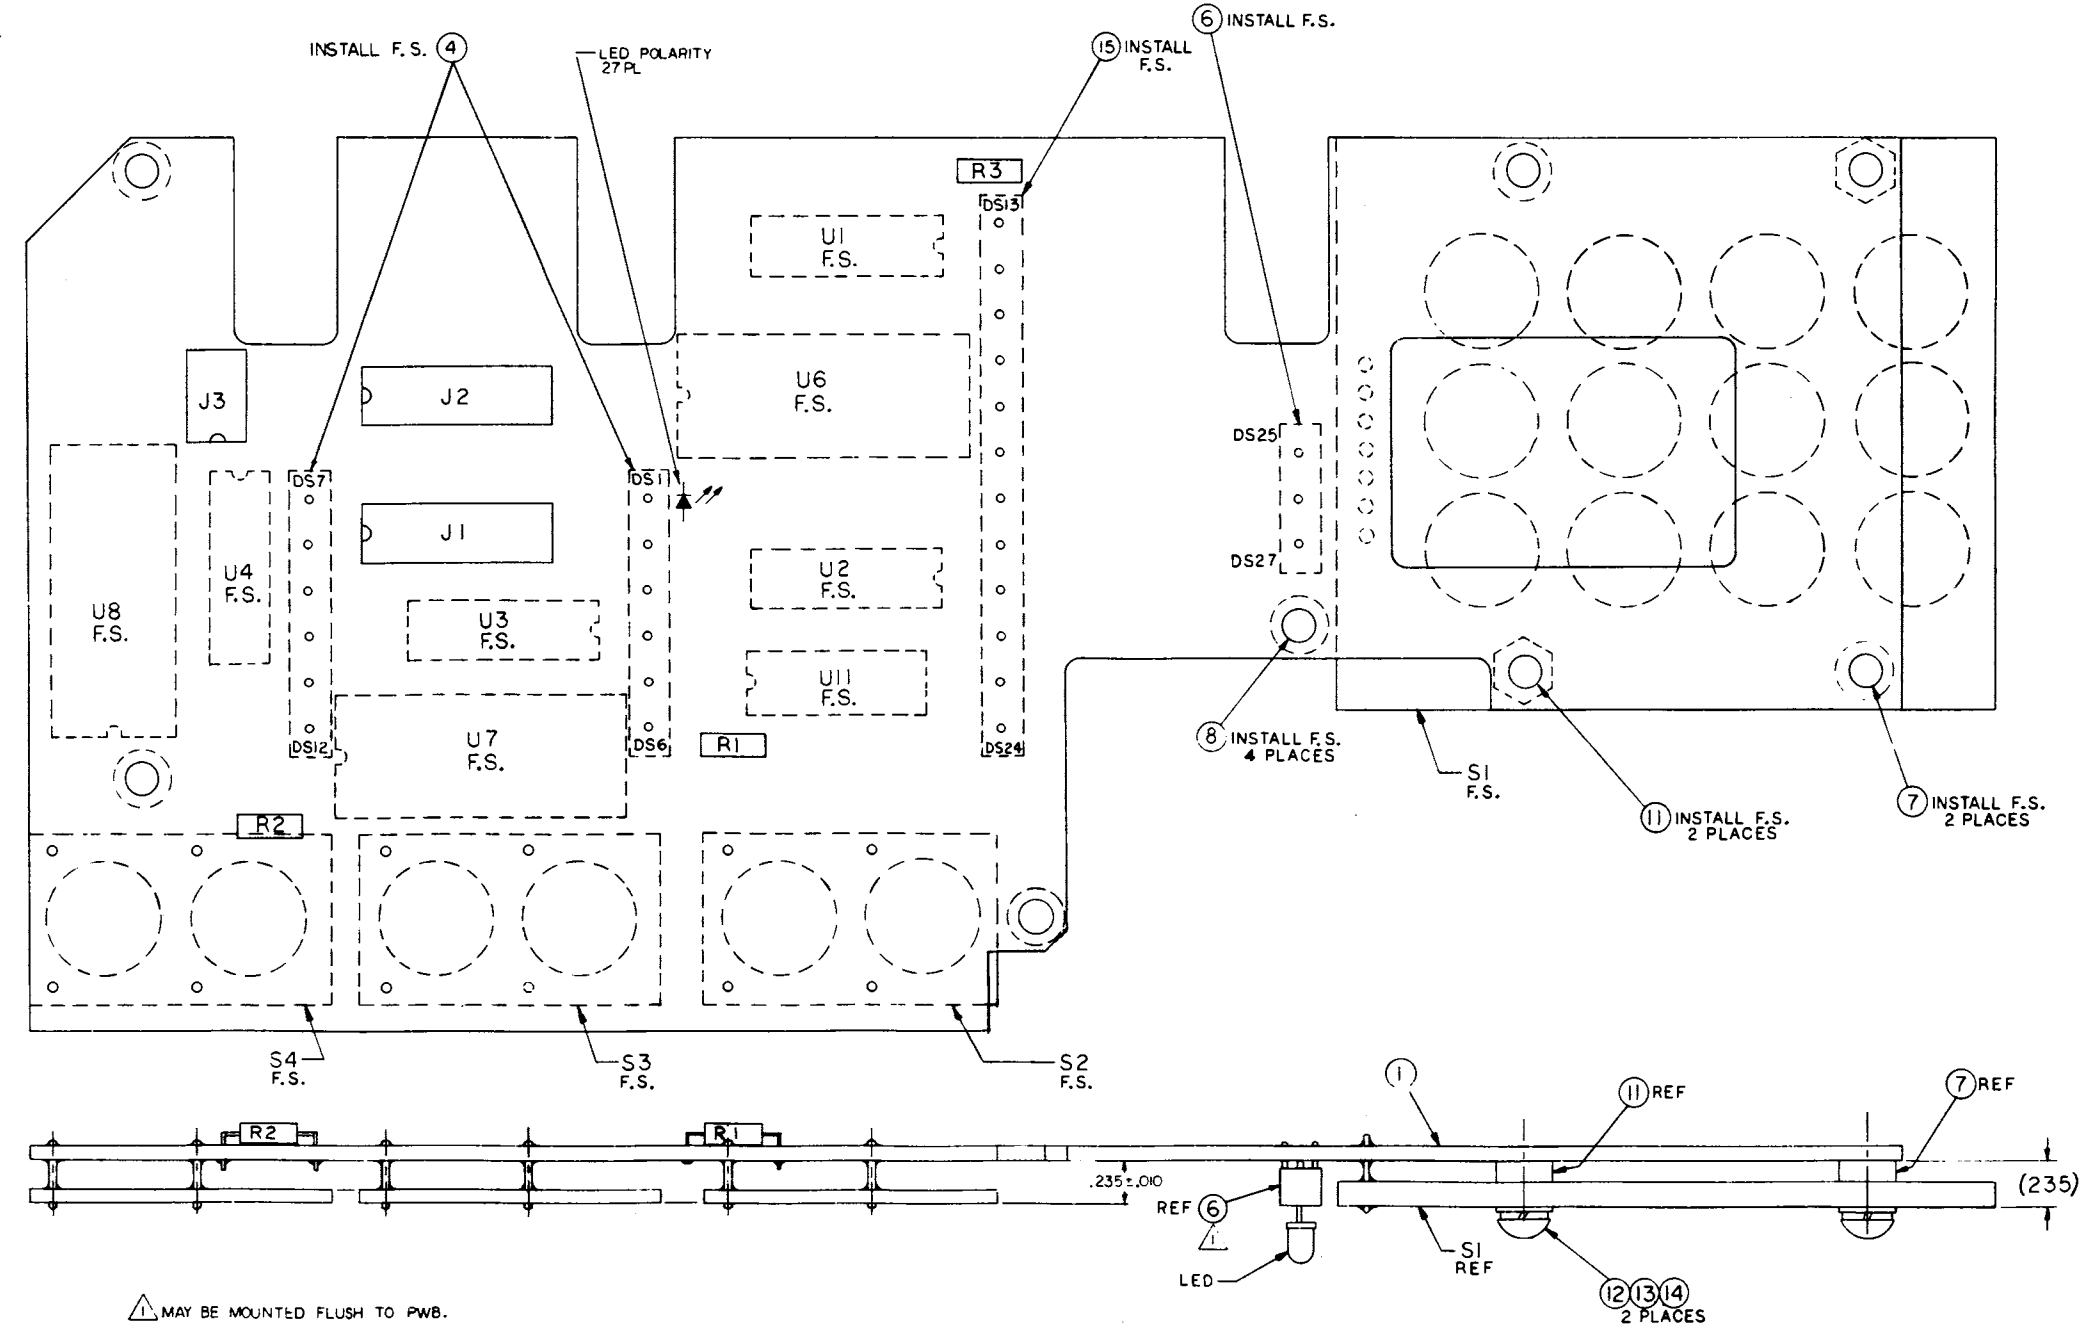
Display Board A14A1 (1-80305A63) Parts Location Diagram
